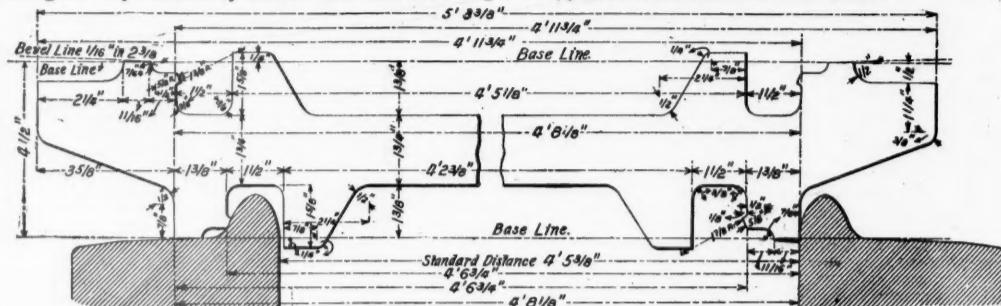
Standard Reference Gage for Mounting and Inspecting Wheels.
